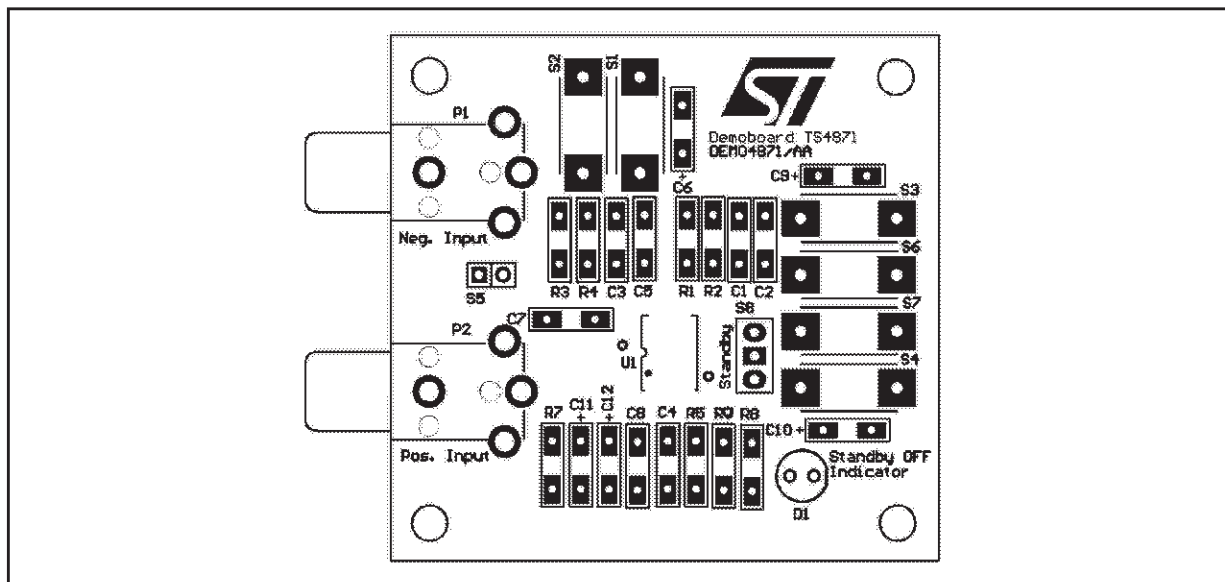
SO8 & MiniSO8 Demoboard Top Solder Layer
